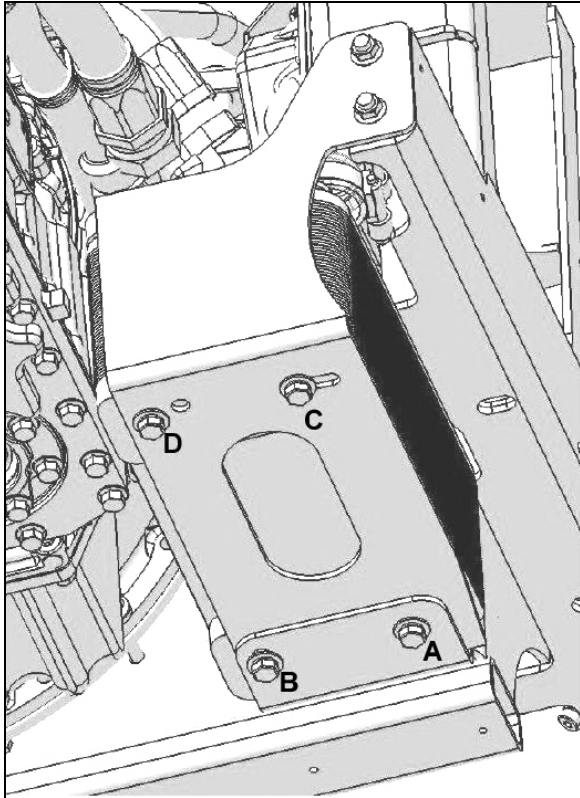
COOLER POSITION DURING ENGINE CRADLE INSERTION OR REMOVAL
